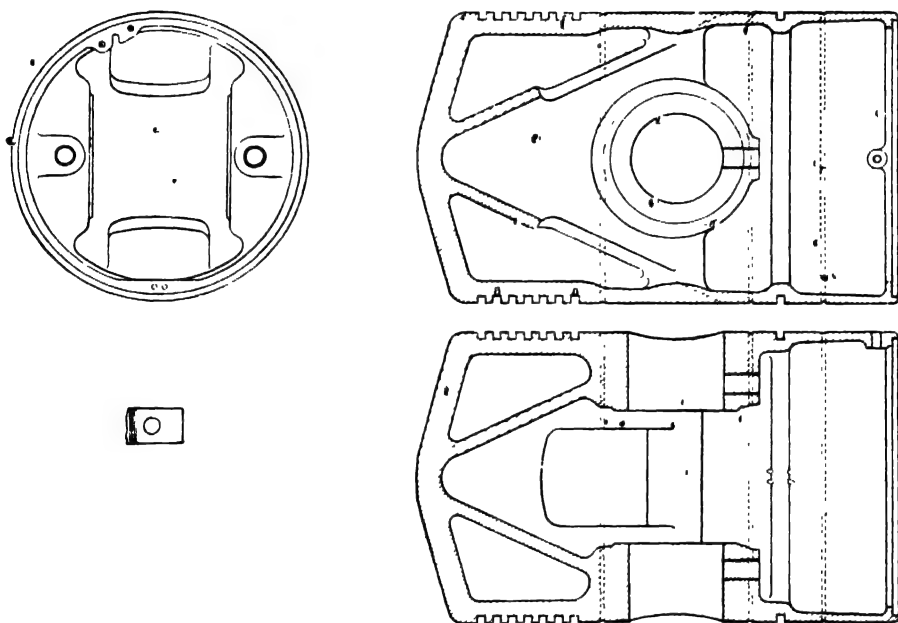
Typical Gas-engine Piston (Ruston Proctor)
